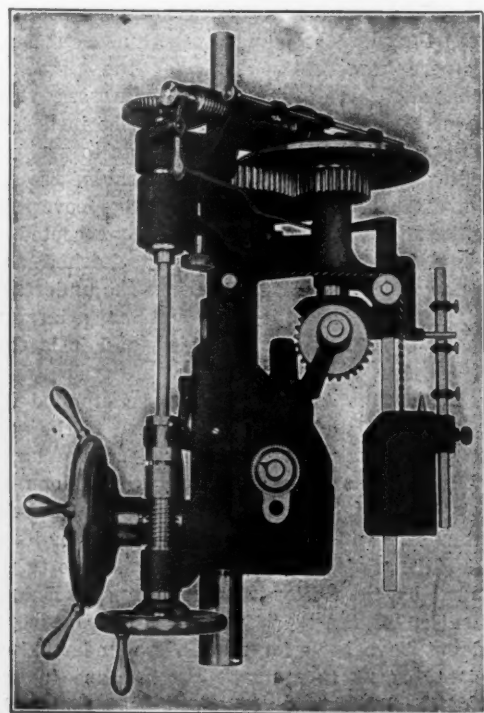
END VIEW OF HEAD UPON ARM, SHOWING
